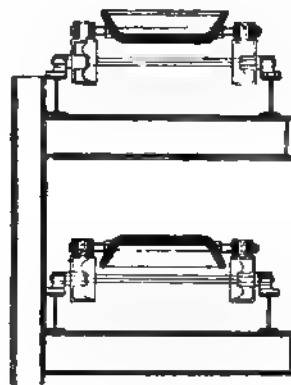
AND 250. Plan and Elevation showing General Design of Hawdon's Pig-Iron Casting Machine.
